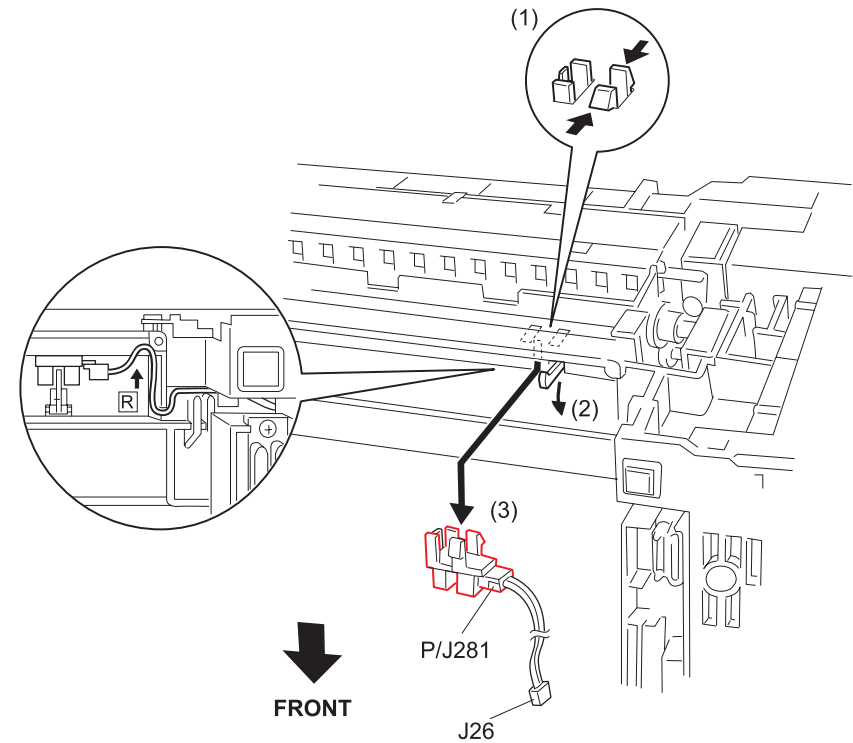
“Sensor Assembly Photo Exit” Removal
